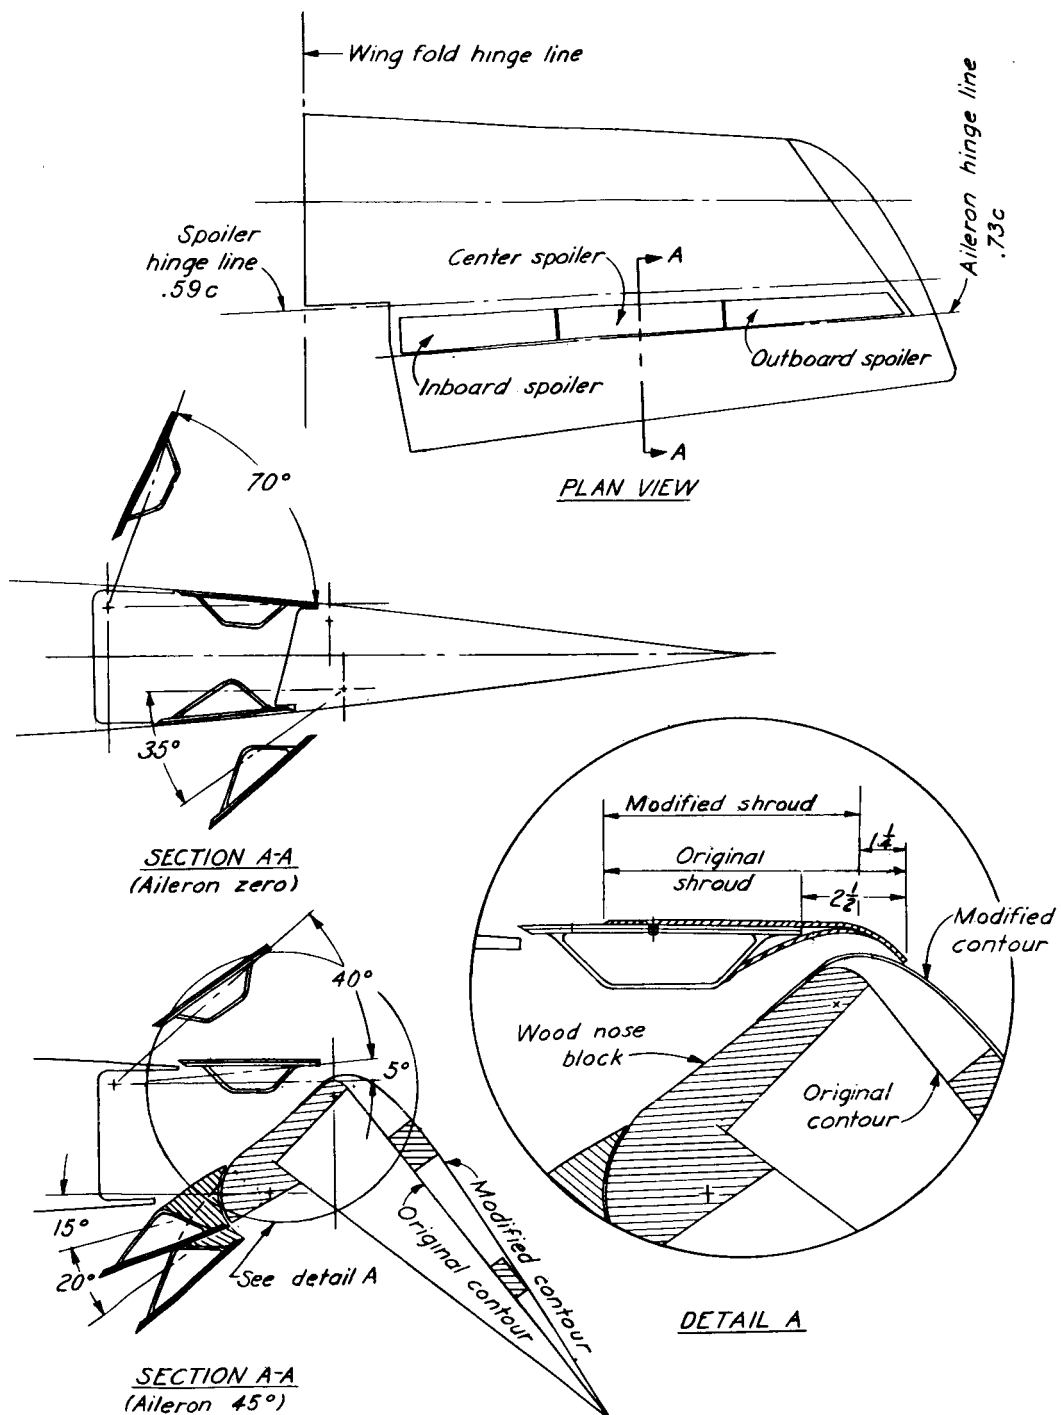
Spoiler and aileron details. All dimensions are given in inches unless otherwise noted.
